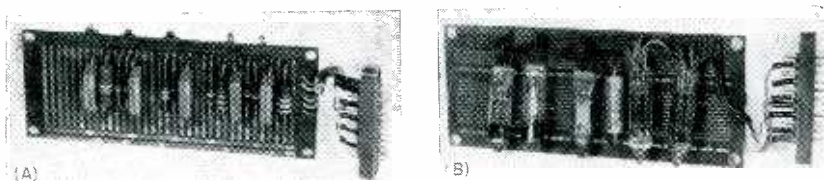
Components are usually attached to one side (A) and tubes to the other (B). The short length of metal strip between the connections to a component are cut with a sharp tool and removed in the developmental stage. Previously prepared cards are used for production units. Heater, plate-supply, input and output connections are brought to a plug
